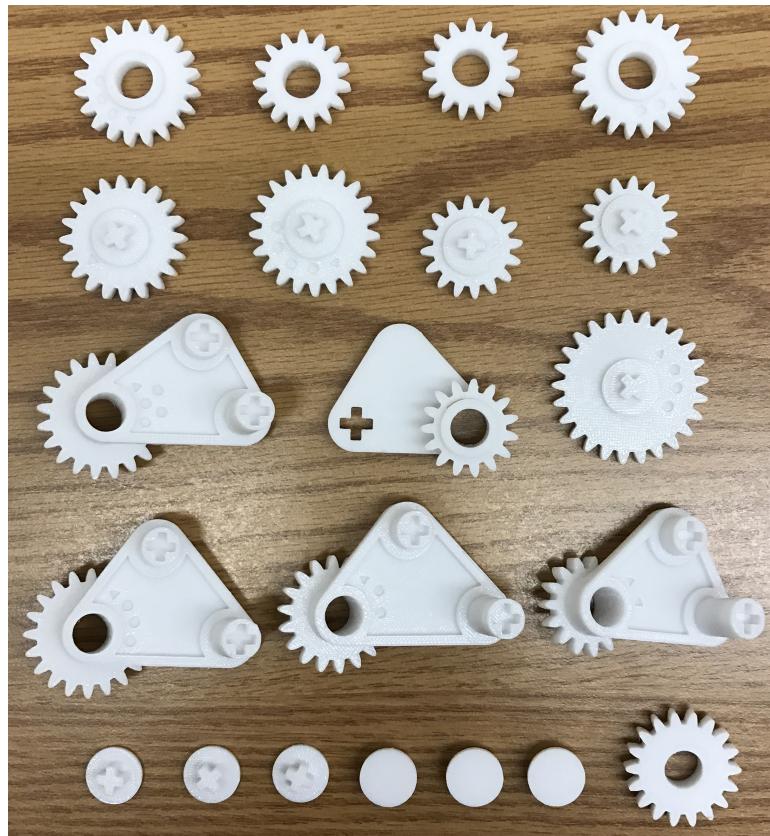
Example of the Butterfly mechanism drive components manufactured by the Fortus 450mc system.
